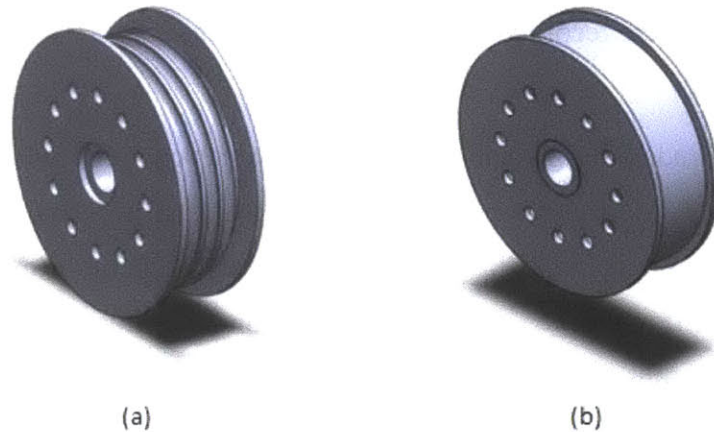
Capstan pulley designs (a) grooved lebus (b) flat winch.
